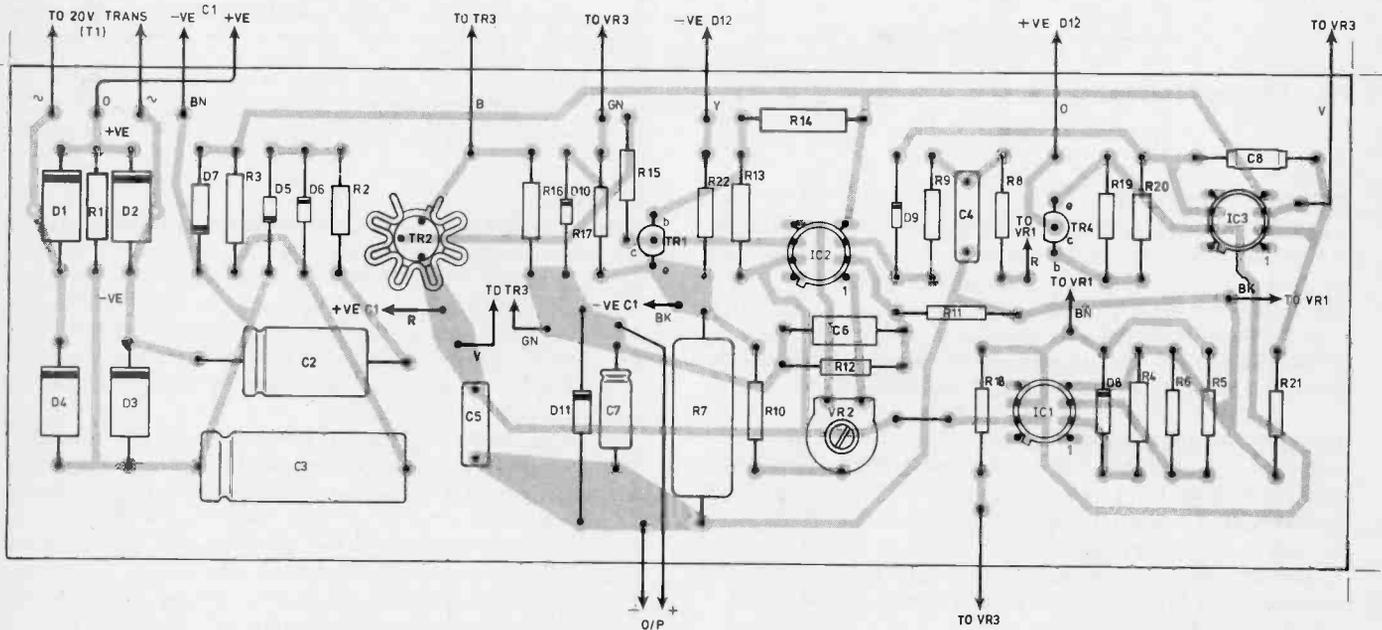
Component layout. If bridge rectifier used R1 can be connected directly to C1
